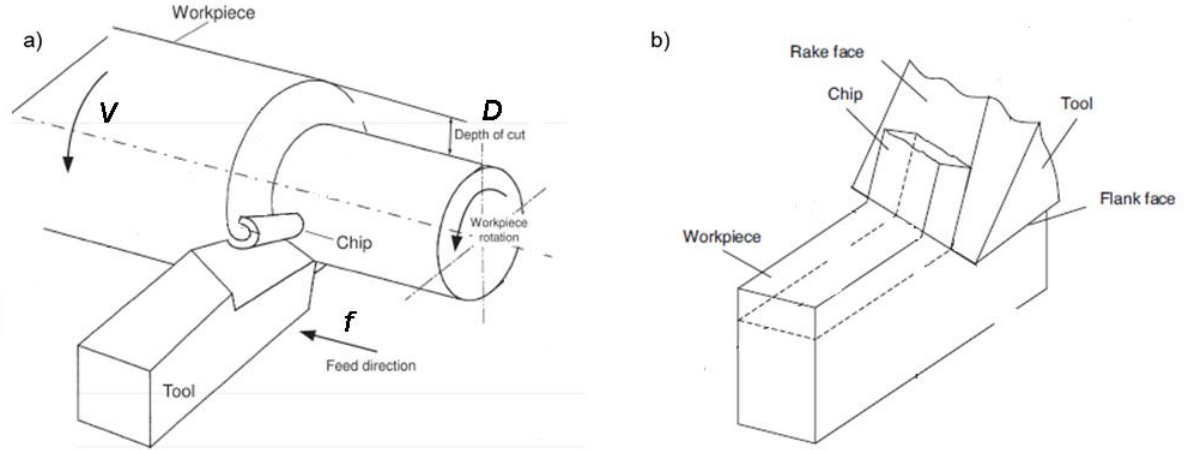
Turning process (a) and cutting tool geometry (b) [17].
